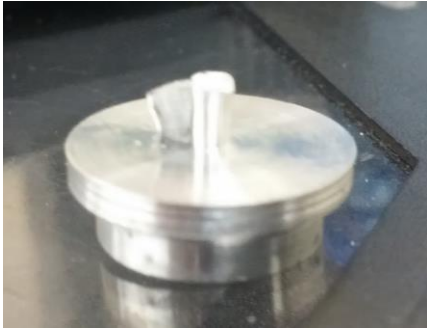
Radiator plug. It is still excessively long, both on the flange side and the end that is placed inside the radiator. Both were sanded down in this case. Also, the top features material from parting that was removed.
